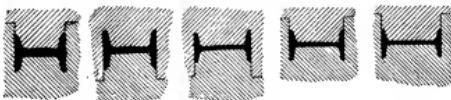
Reduction of Girder Section in Finishing Rolls.
